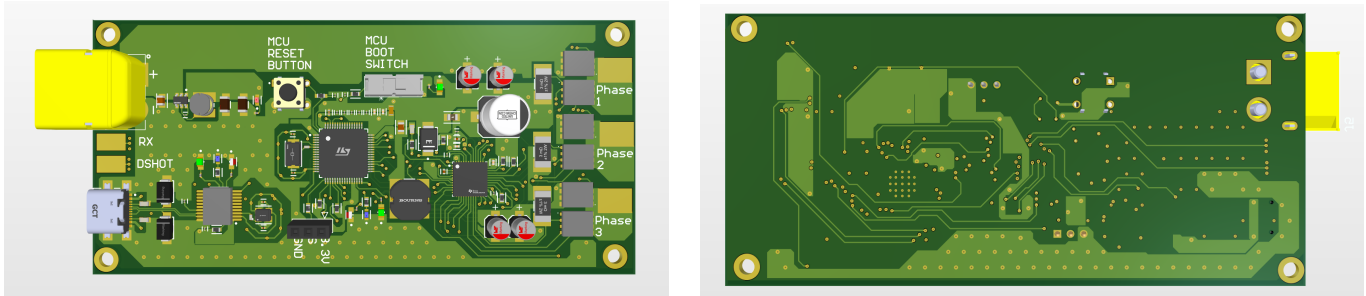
Discrete ESC PCB — Top and Bottom Layers
